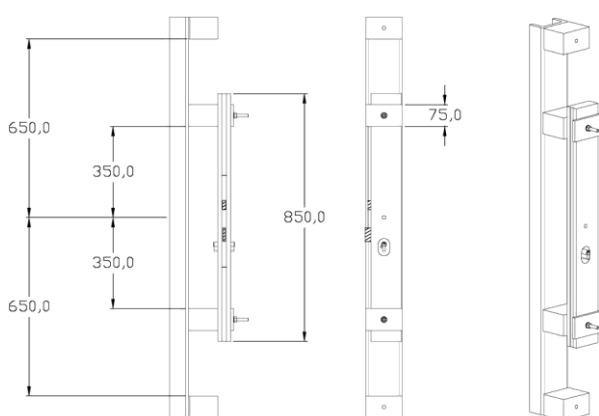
Test rig configuration for oval or euro profile cylinder test in plywood block. Alternatively, a block as specified in BS 3621:2017 5.2.1 (b) may be used.
